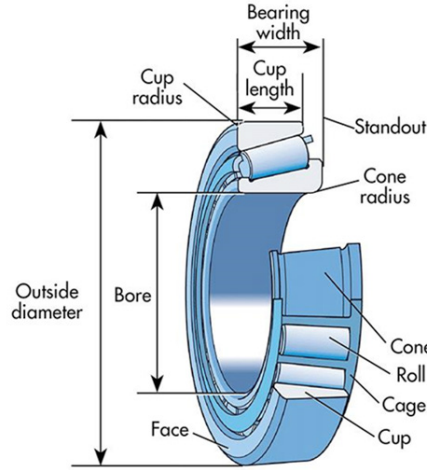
Recent Single row Tapered Roller Bearing manufactured globally.
